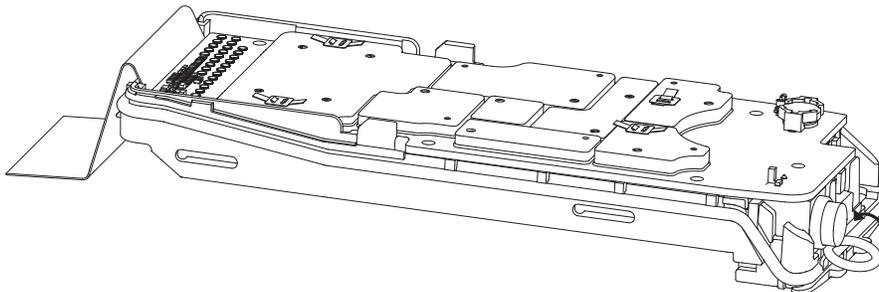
Assemble the Main O-Ring at Antenna Holder
